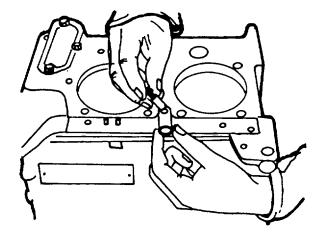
Assembling Threaded Sleeve to Middle Screw
